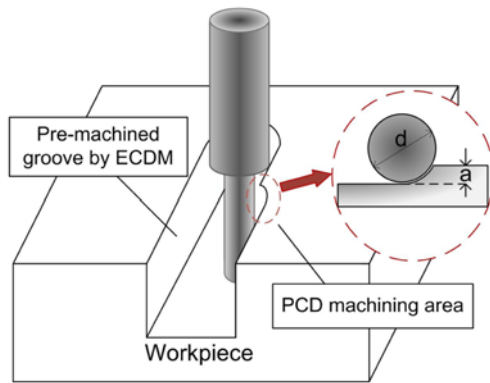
The radial depth of cut in micro PCD grinding of glass (d : tool diameter, a : radial depth of cut)
